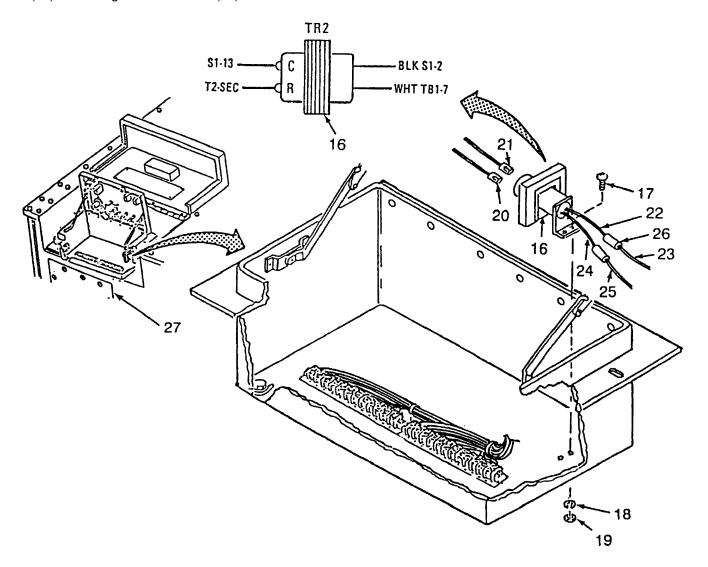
Control Box Assembly Terminal Boards/Transformer (Sheet 3 of 3)
